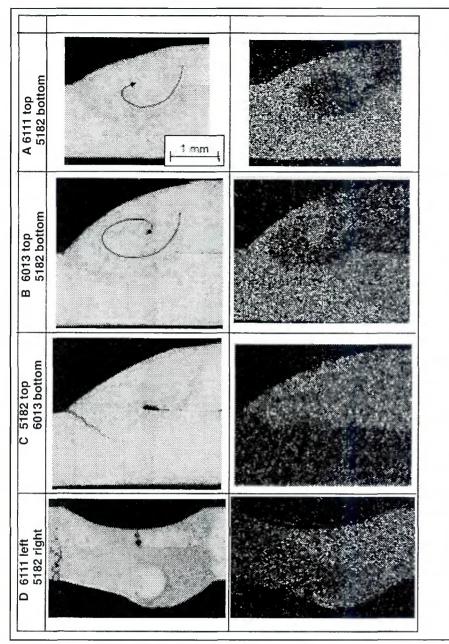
Fillet welds in lap joints and butt joint welds between 5xxx and 6xxx series aluminum alloys showing mixing in weld pools.
